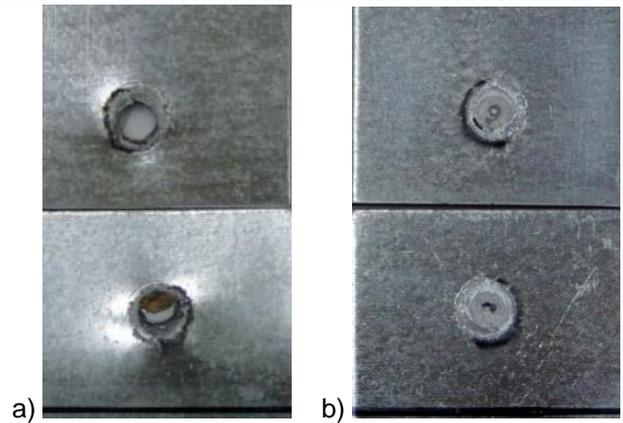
Spot welded joints after tensile test: (a) sheet thickness of 1.5 mm and (b) sheet thickness of 2.5 mm
